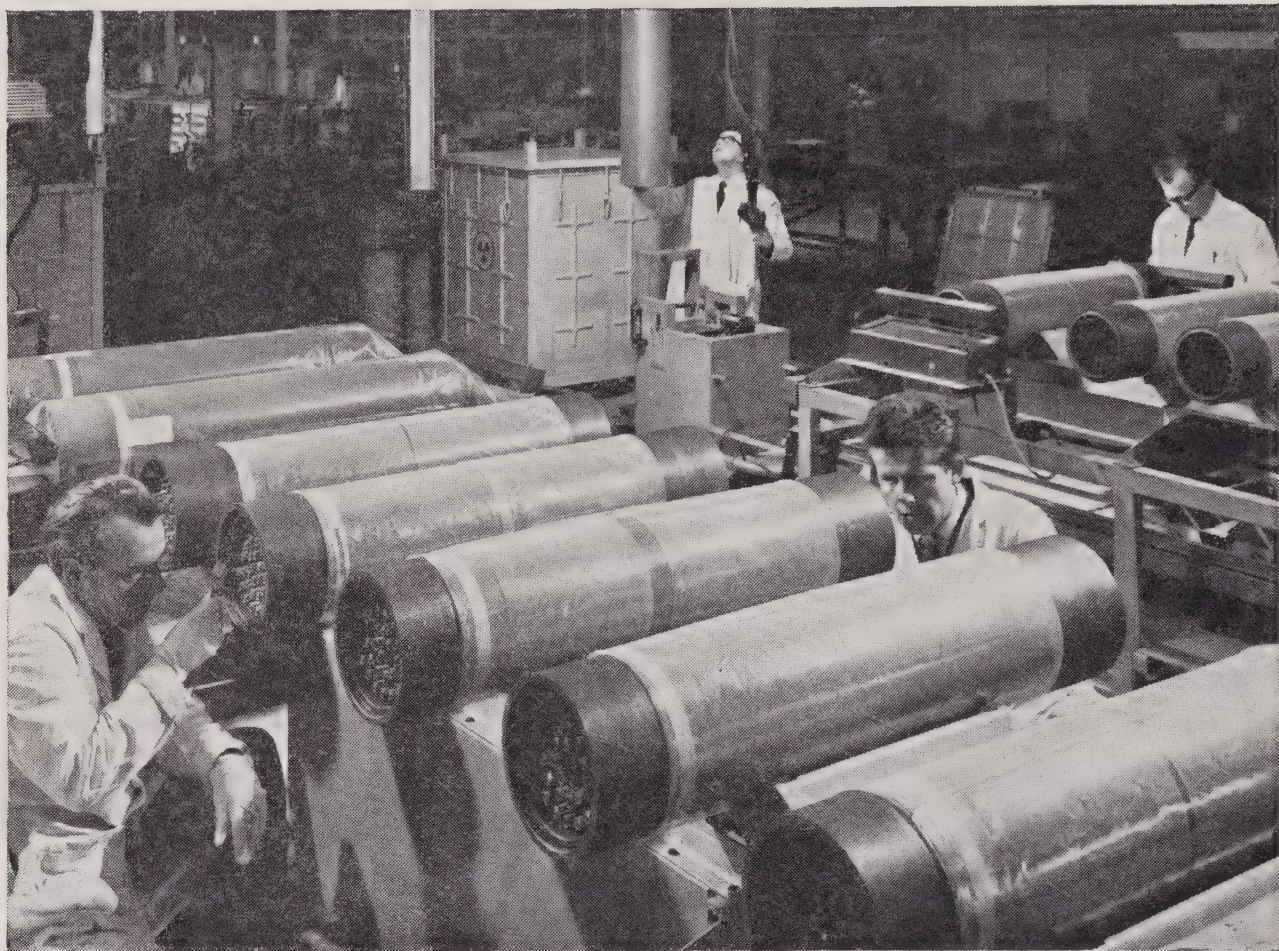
Inspection of uranium oxide fuel assemblies for Advanced Gas-cooled Reactors. Each of the 36 'pins' contains a large number of small sintered cylindrical pellets.
